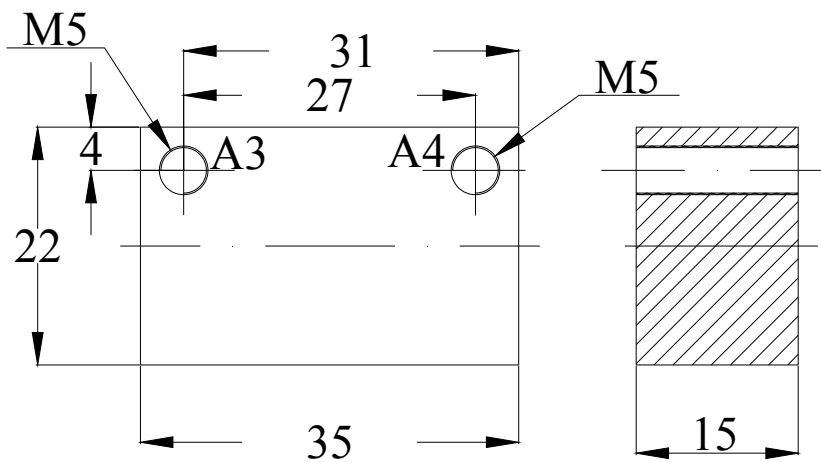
Cutting twice thread M5x0.8 on holes A3 and A4
